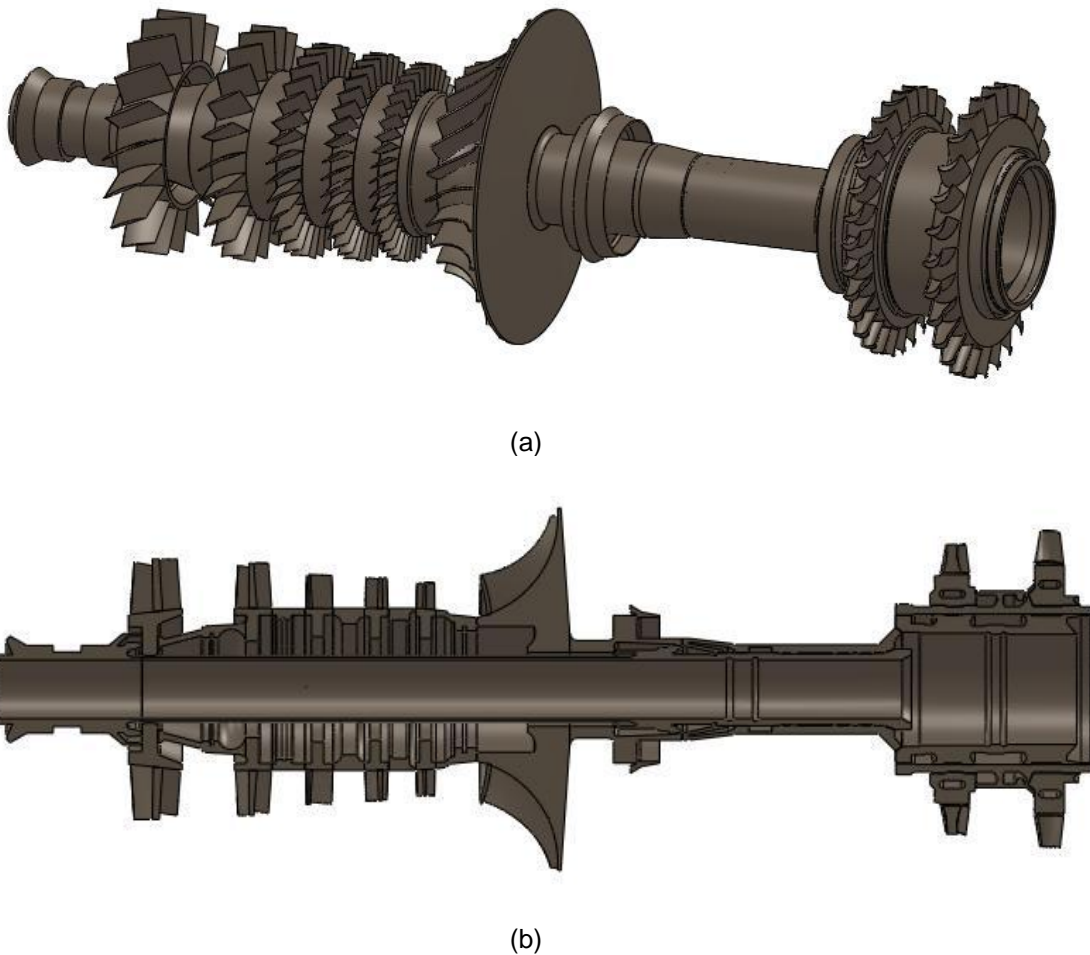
Solid model of T700 engine rotor (a) Diametric view (b) Front section view
